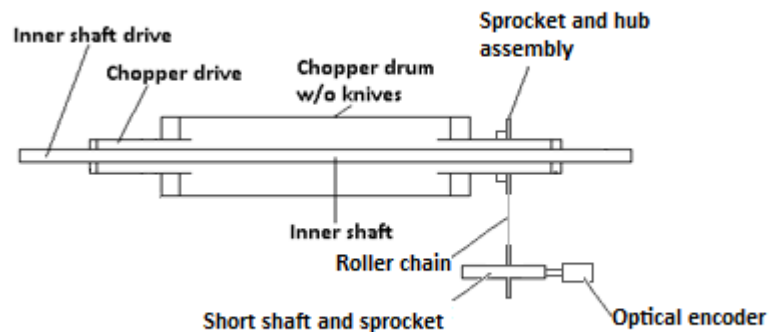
Cross-sectional sketch of a chopper, showing the location that the sprocket and hub assembly was attached to the 2X0.5, 2X3 and 3X3 chopper, along with the roller chain, short shaft and sprocket used to indirectly attach the optical encoder.
